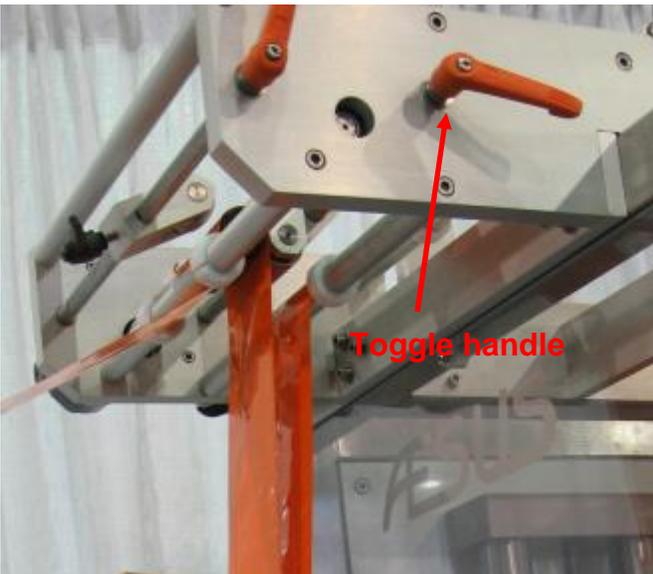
This figure shows the drive roller toggle handle used to tighten the drive roller.
